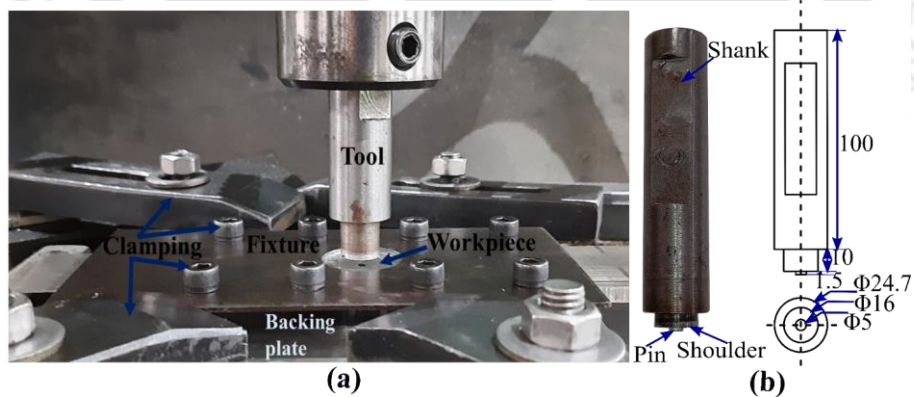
FSSW details (a) FSSW setup (b) FSSW tool (all dimensions are in mm)
